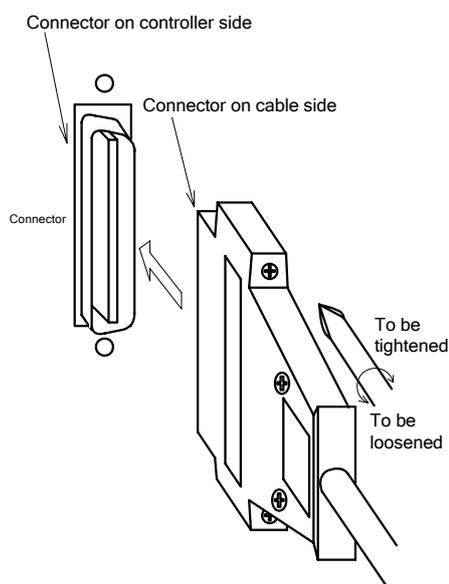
Attaching and detaching external I/O signal cable (SYSTEM)
